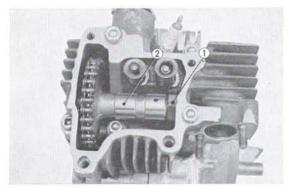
(1) 3 × 12 mm dowel pin (2) Cam shaft
